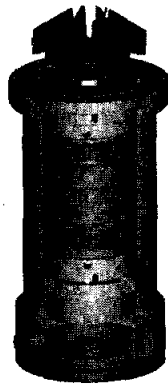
Revolve/SKF 900DC60 spindle with impeller
